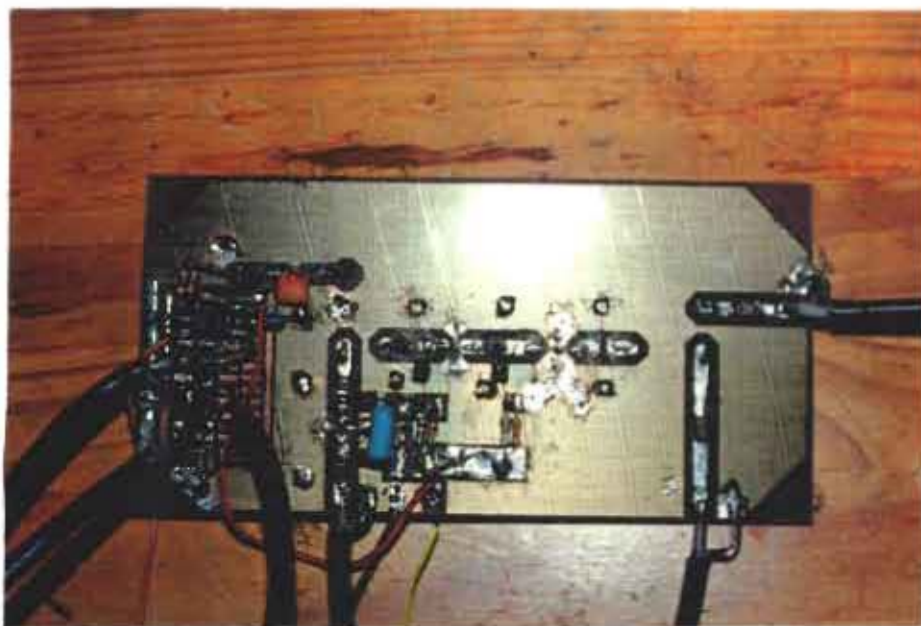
Photograph of the Prototype Receiver Board in the Testing Phase
